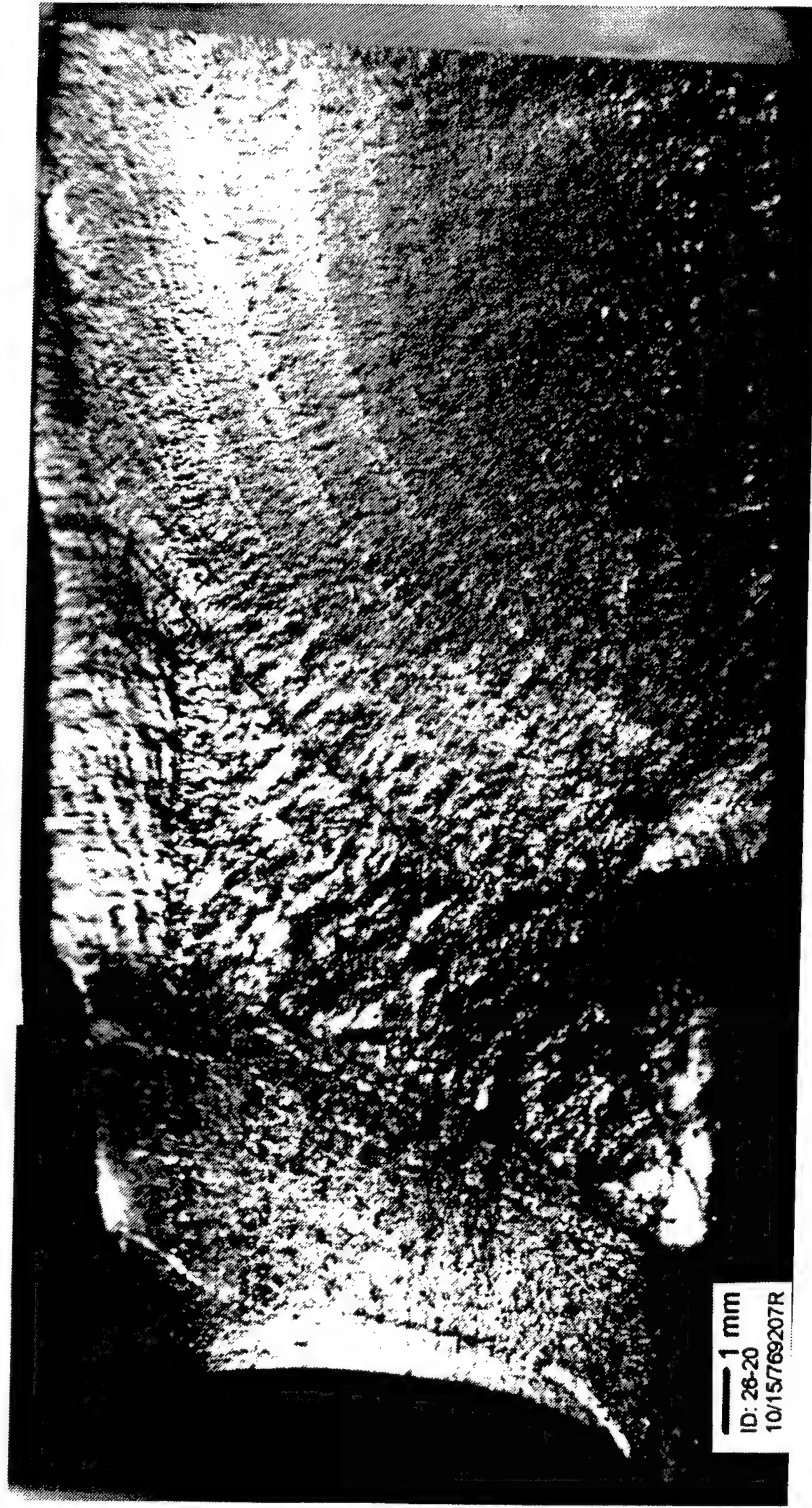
Fatigue fracture surface of the HSLA-80 but weld sample subjected to random loading:
